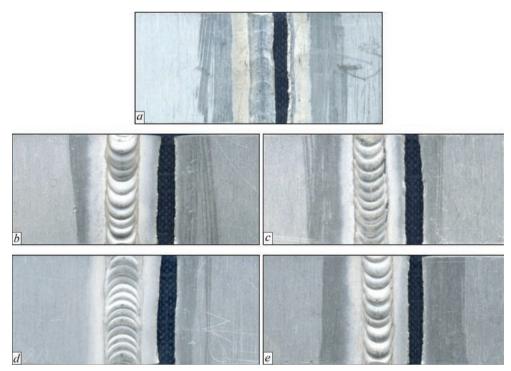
Surface of V1341T alloy weld after removal of technological reinforcement: a — isolated defects; b — scattered defects
